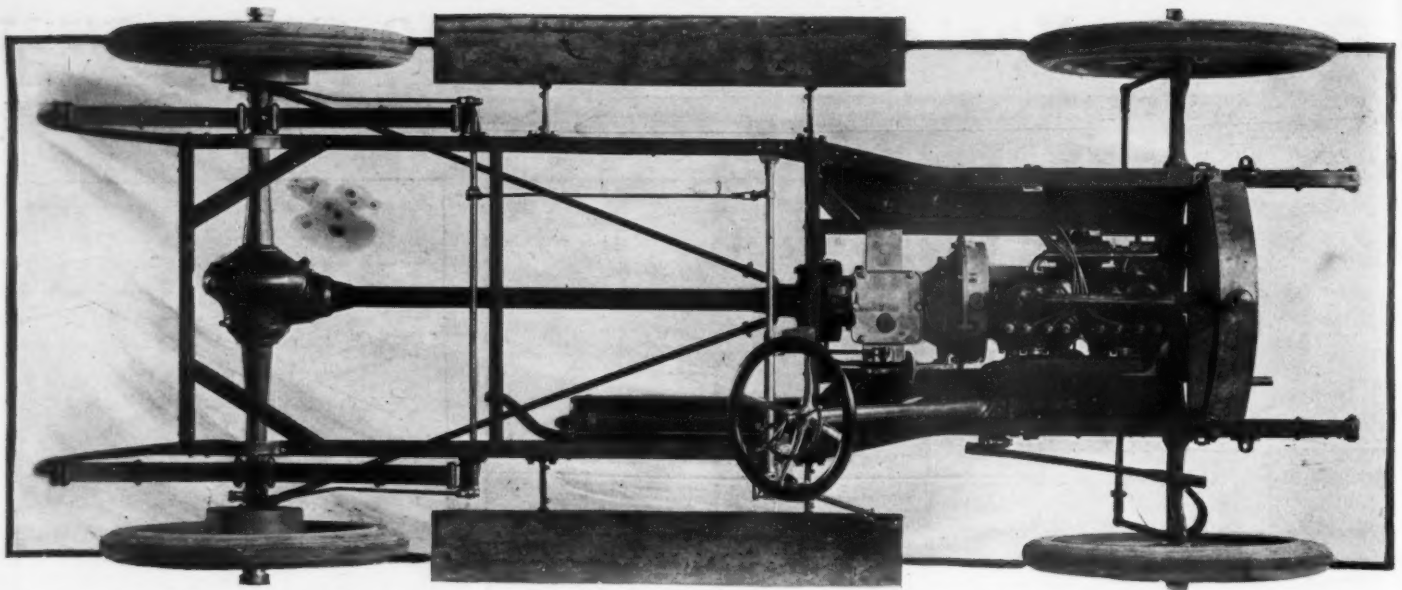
MARION CHASSIS SHOWING STUTZ COMBINED GEARBOX AND DIFFERENTIAL ON REAR AXLE
